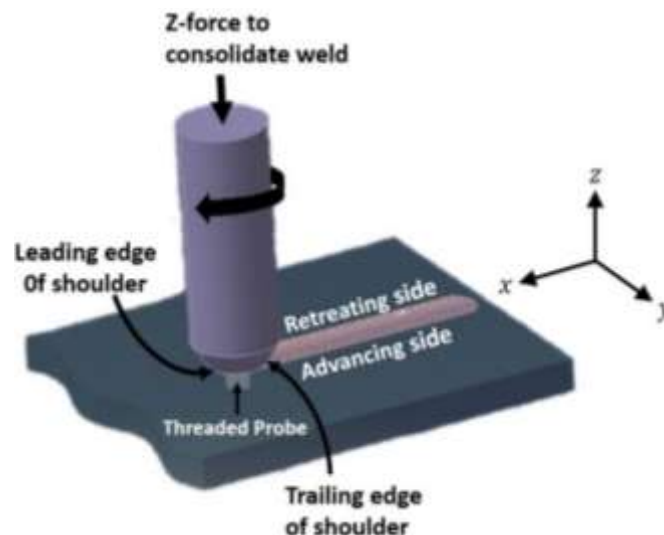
Depiction of linear friction stir welding process including axis-direction labeled in conventional terms.
